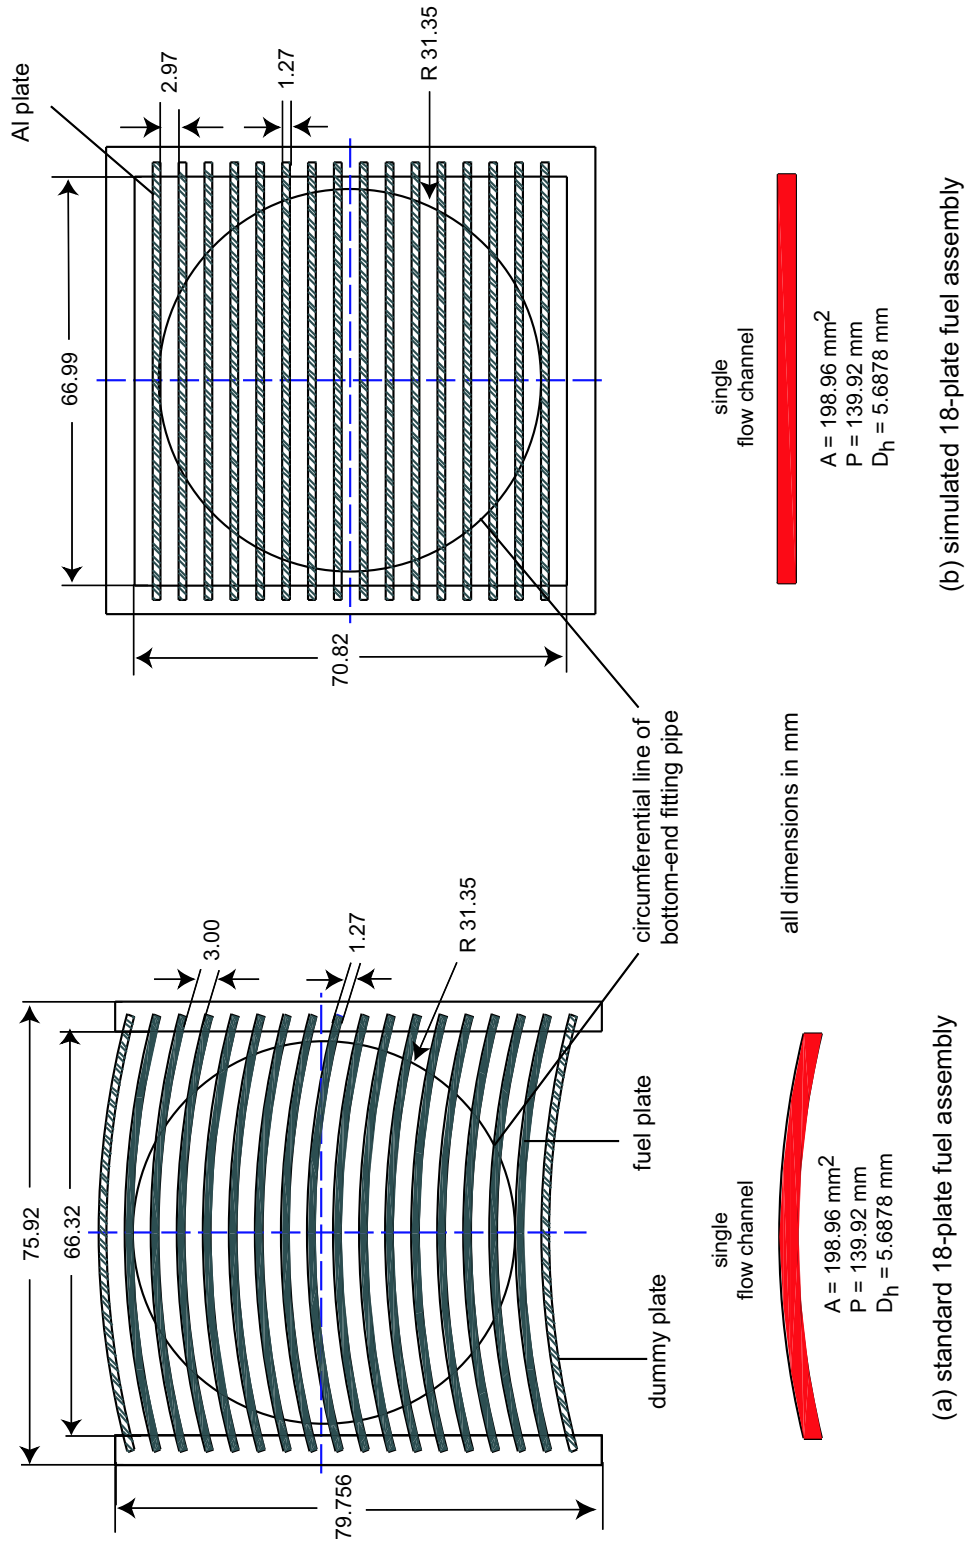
Comparison of the standard 18-plate assembly and the simulated 18-plate assembly from top plane view
